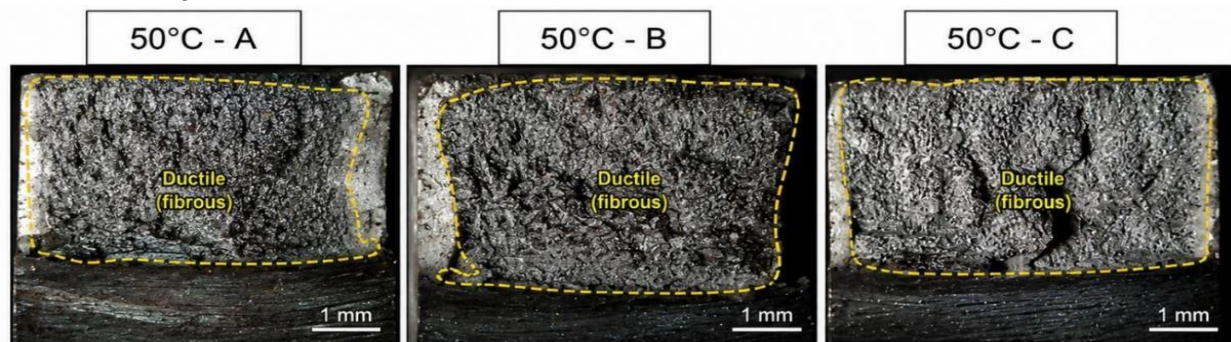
Fracture Surface of Leaf Spring Steel Specimens Before the Carburizing Process
